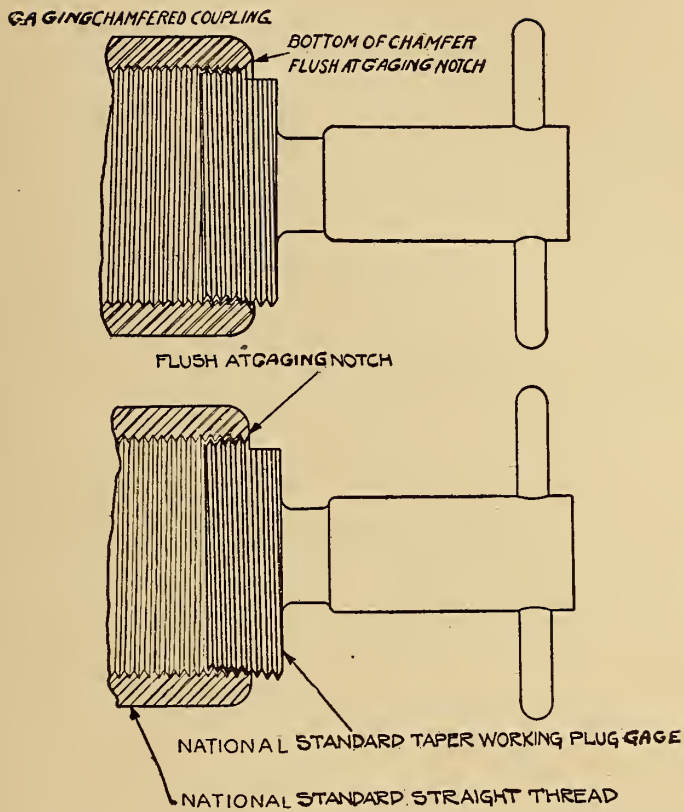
Illustration of straight threaded coupling gaged with standard taper working plug gage
